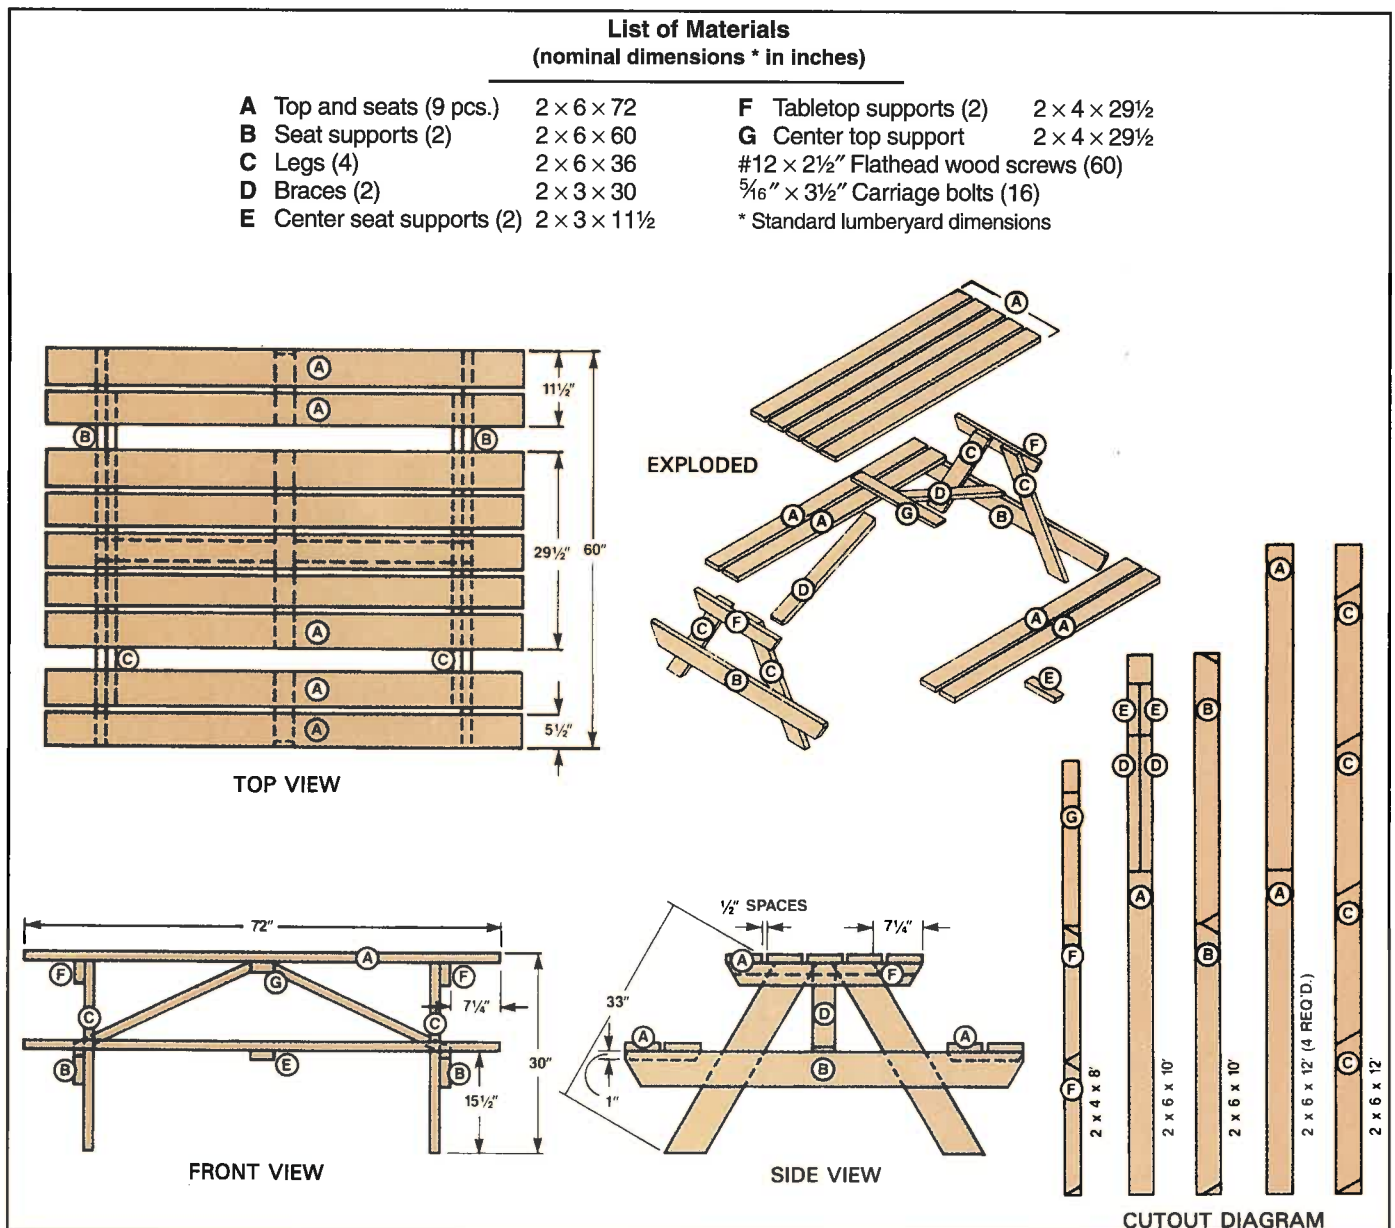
A three-view drawing is the most important part of shop drawings. Exploded views and cutout diagrams assist the cabinetmaker. Parts balloons help relate component parts in each view. (Shopsmith)
